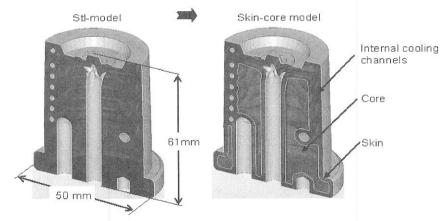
3D-model of the complex tooling insert (left) and skin-core model (right)
